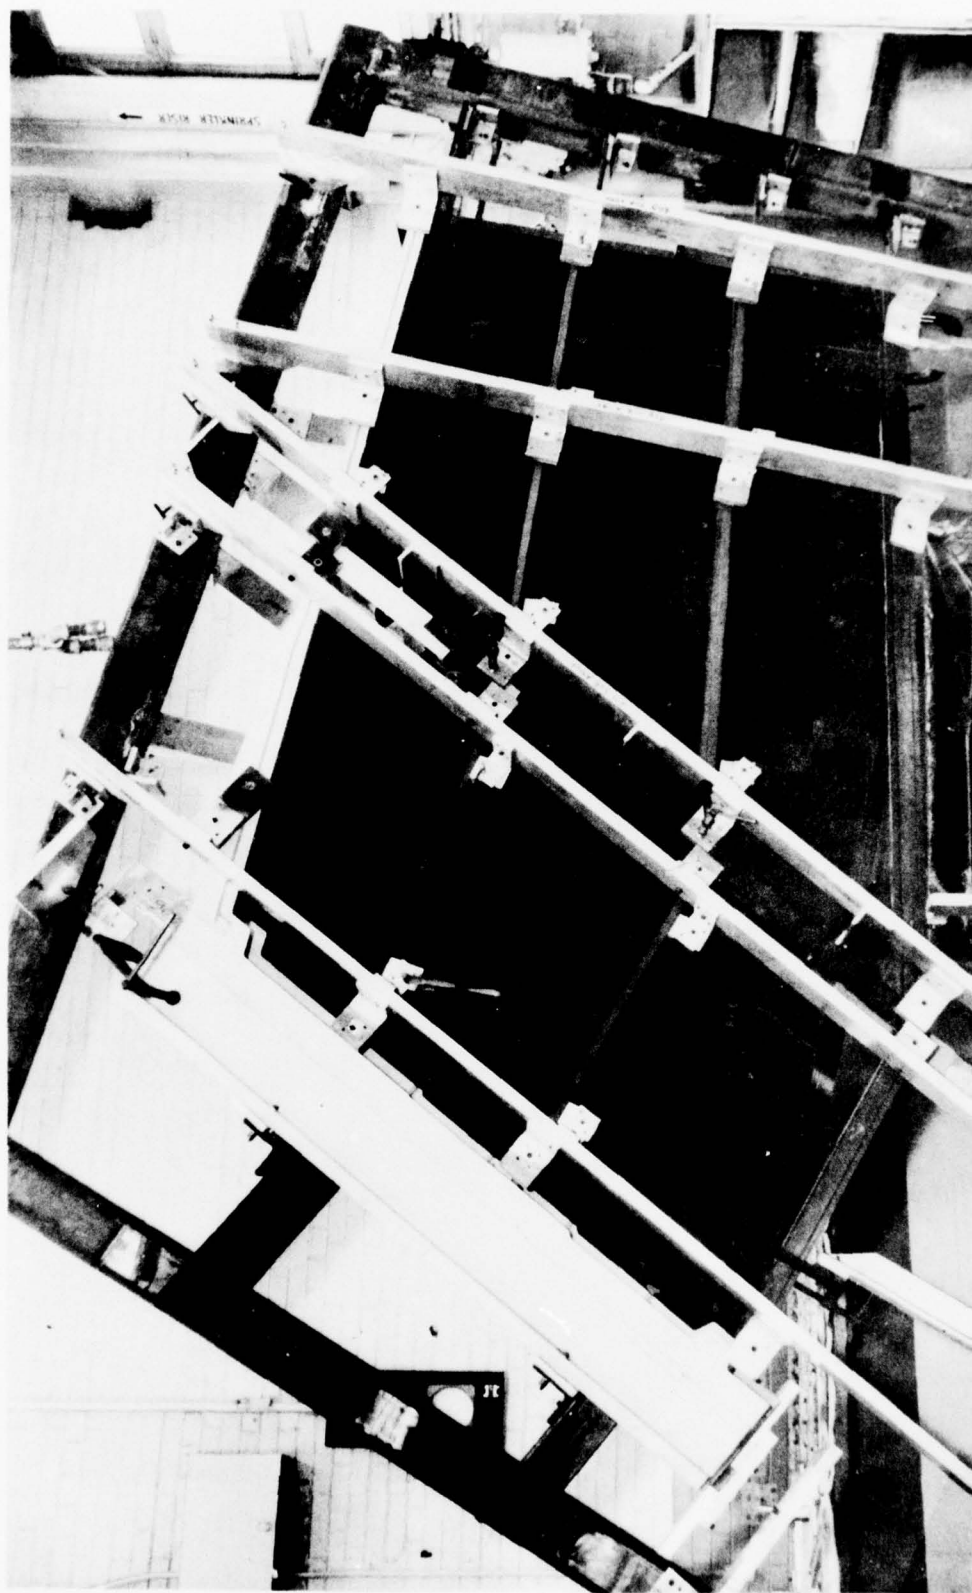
COMPOSITE WING DETAIL PARTS IN ASSEMBLY/DRILL FIXTURE
